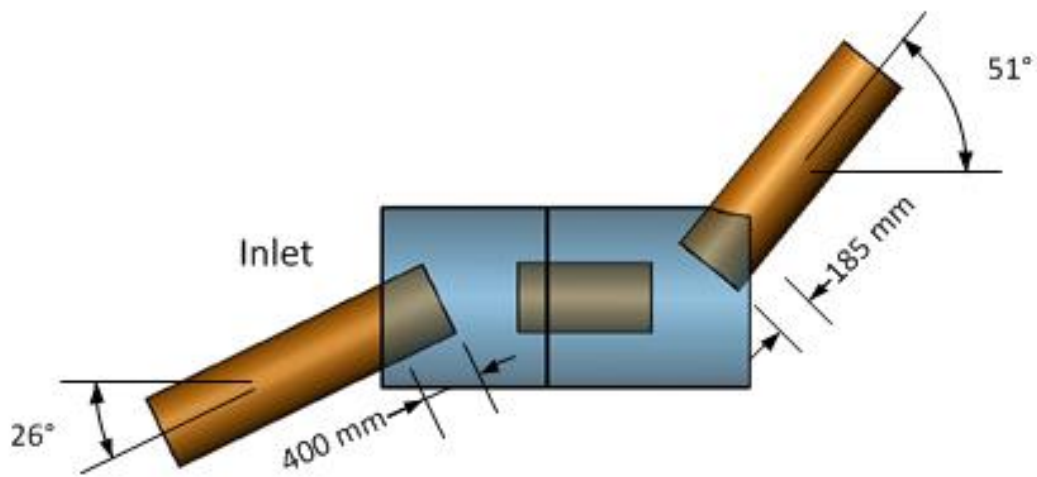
Simple Large Muffler LM5, Other Details / Dimensions as per LM4
